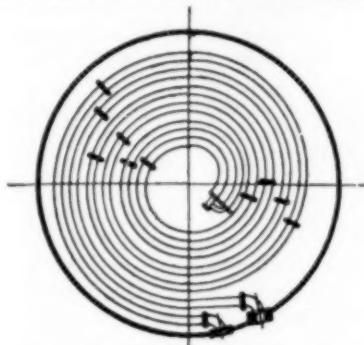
COIL VACUUM PAN, DOUBLE COILS.
